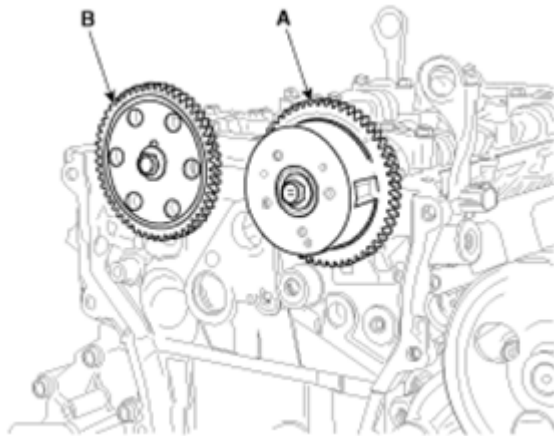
Intake CVVT Assembly & Exhaust Sprocket (Single CVVT)
